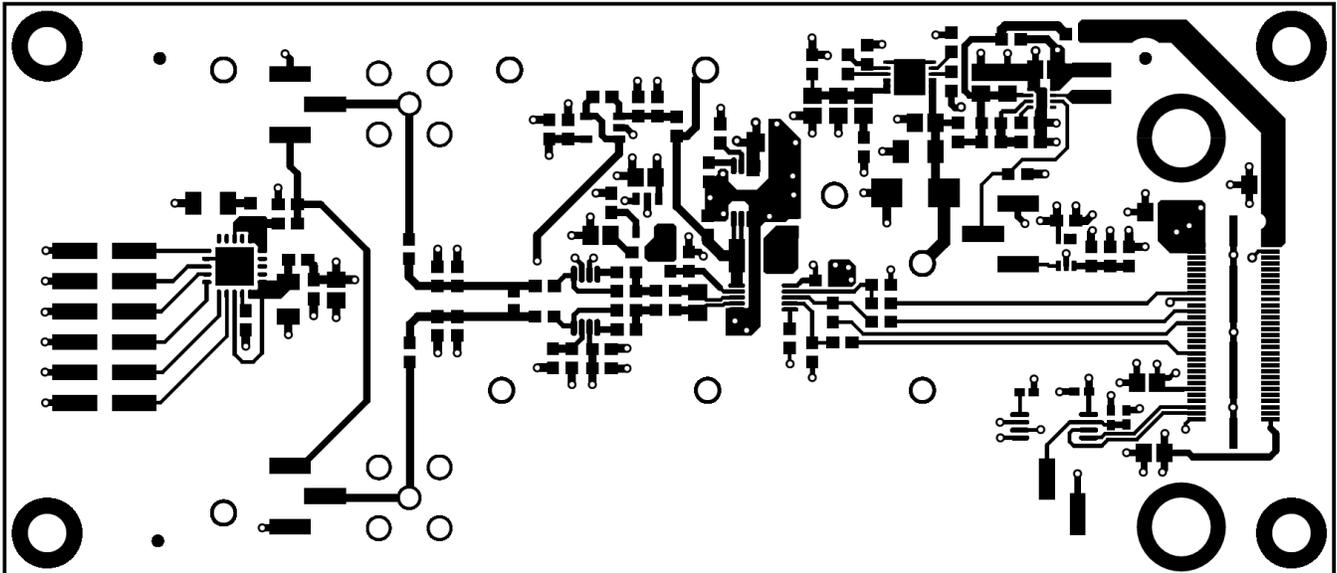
REF6025EVM PCB Layer 1: Top Layer
